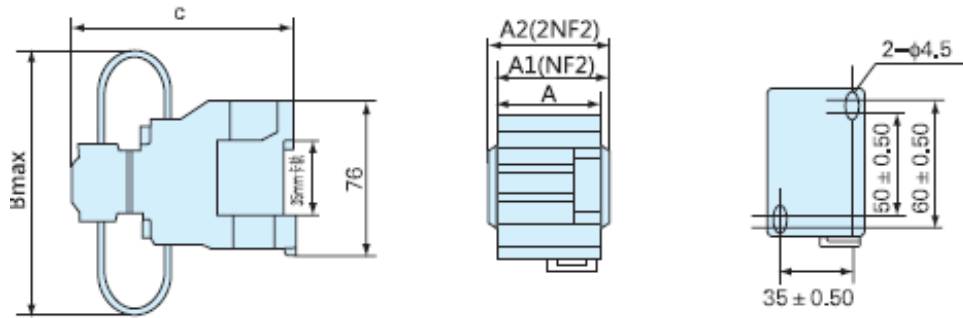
NDK1-25 External Dimensions and Installation Dimensions
